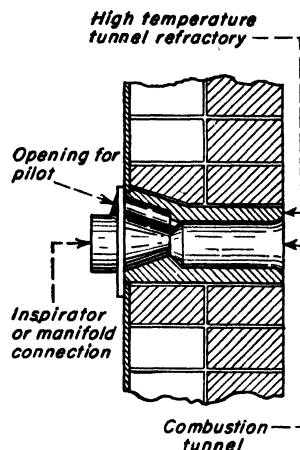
Surface-combustion tunnel burner. (*Surface Combustion Corp.*)
